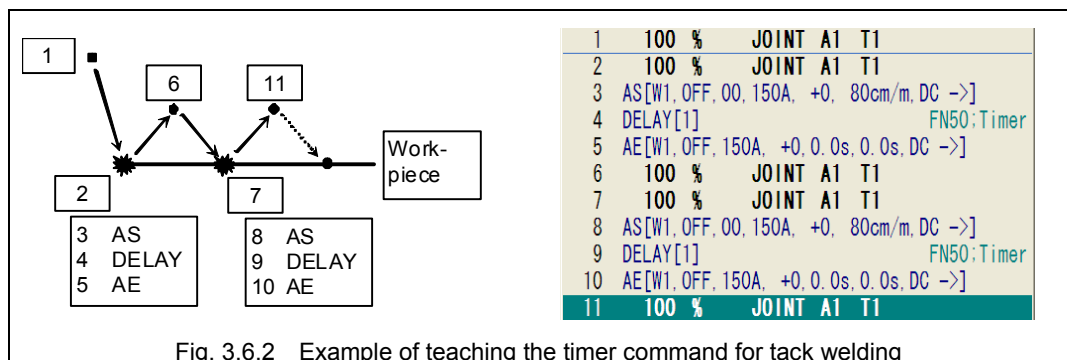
Example of teaching the timer command for tack welding
